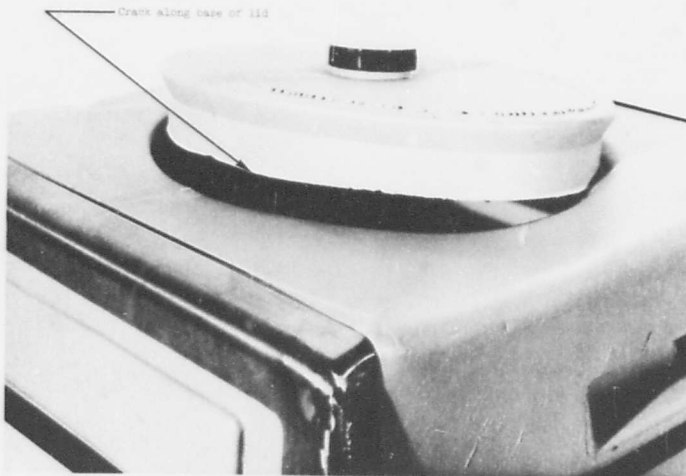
DAMAGE TO FILLED CONTAINER DROPPED ON SIDE FROM 5 FEET
